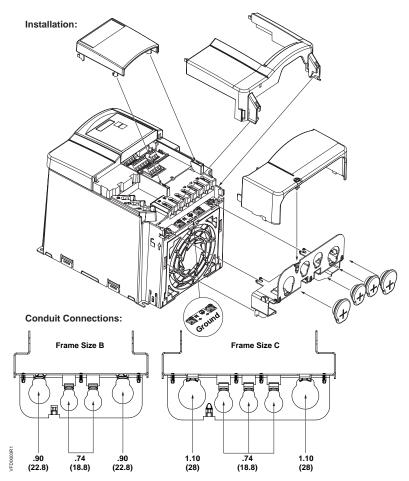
Gland Plate Installation and Conduit Connection Diameters for Frame Size B and C.
